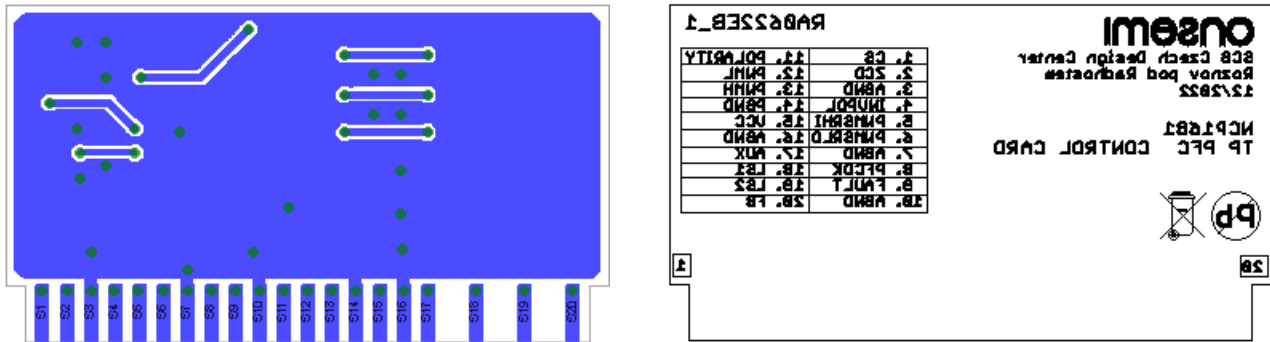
Bottom Layer PCB Layout and Assembly Plan of PFC CONTROL CARD
